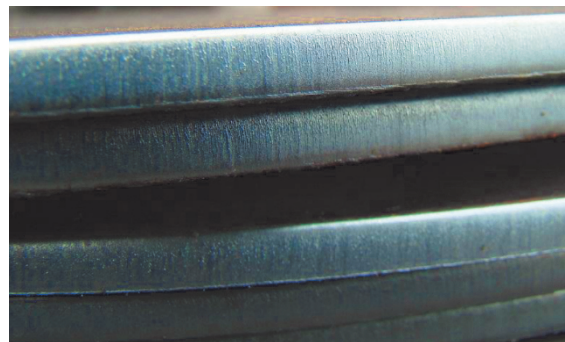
Edge of the metal sheet after plasma cutting (Messer HyPerformance HPR130)
